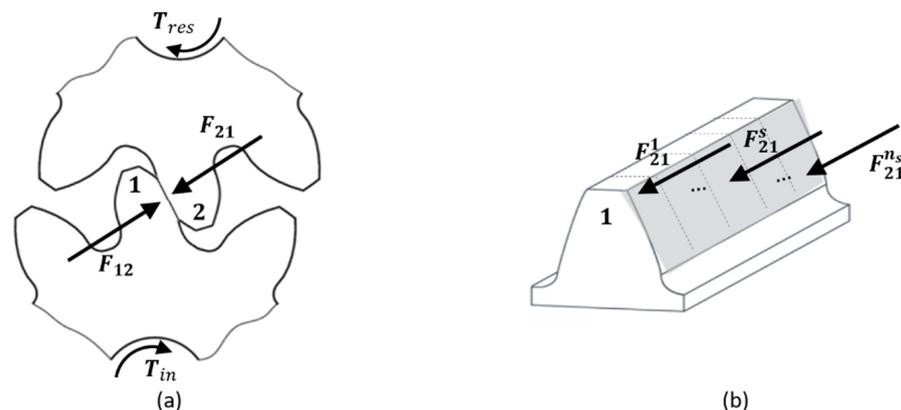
Contact problem: (a) external forces acting on the meshing gears; (b) slicing approach.
